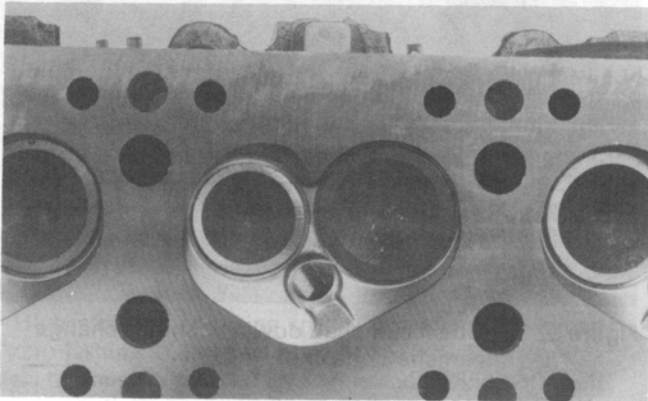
Heart-shaped combustion chamber in aluminum cylinder head has 28cc volume.
